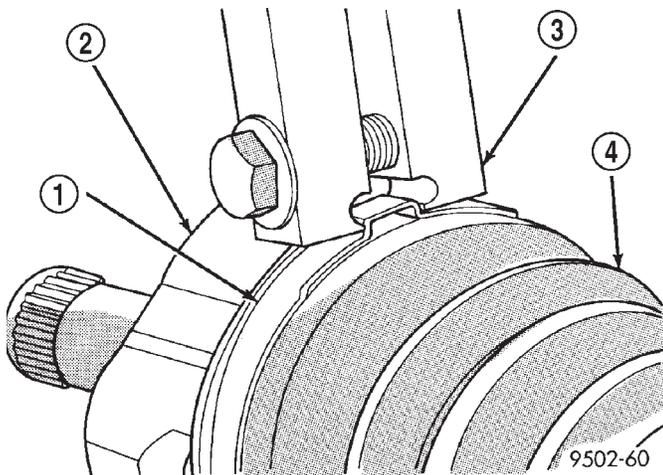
Crimping Tool Installed on Sealing Boot Clamp
